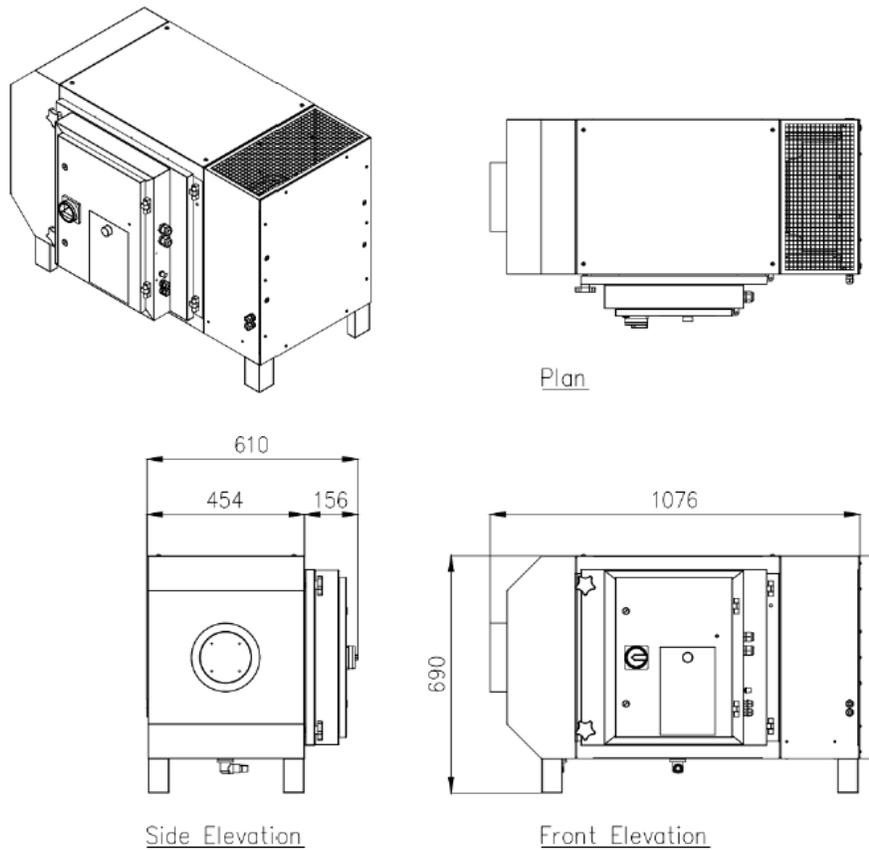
ESPi 2000 Dimensions (dimensions in millimetres)
